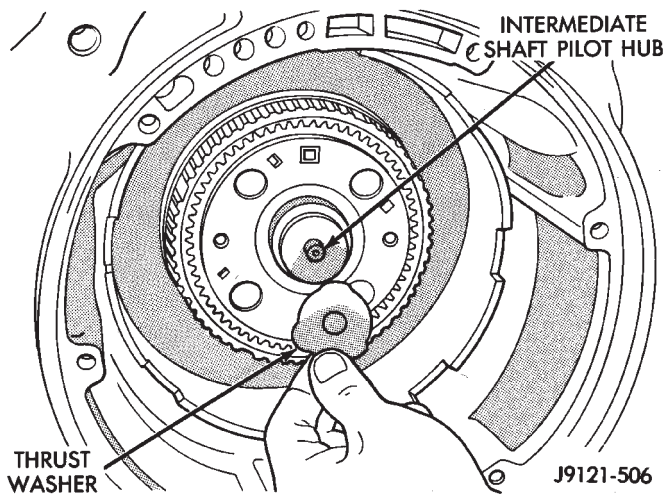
Removing Intermediate Shaft Thrust Washer—46RH
